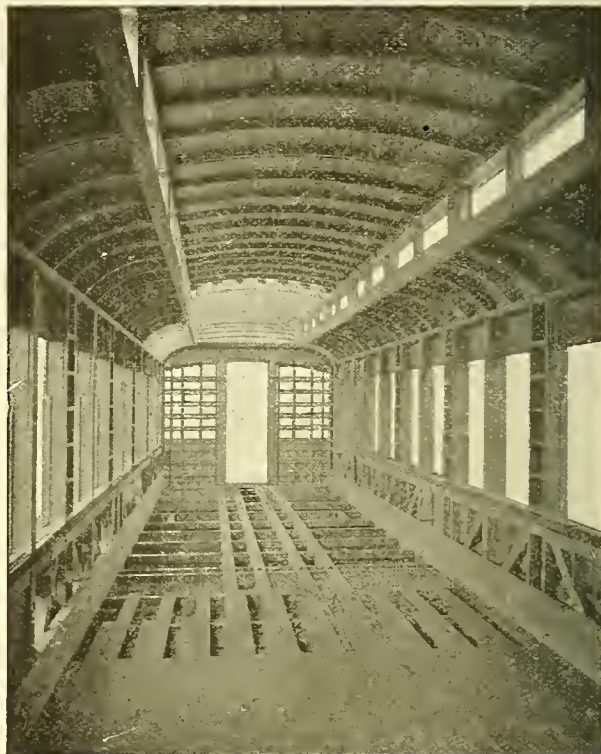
Interior View, showing Sills, Bridging, Truss-plank, Trussing and Superstructure.
